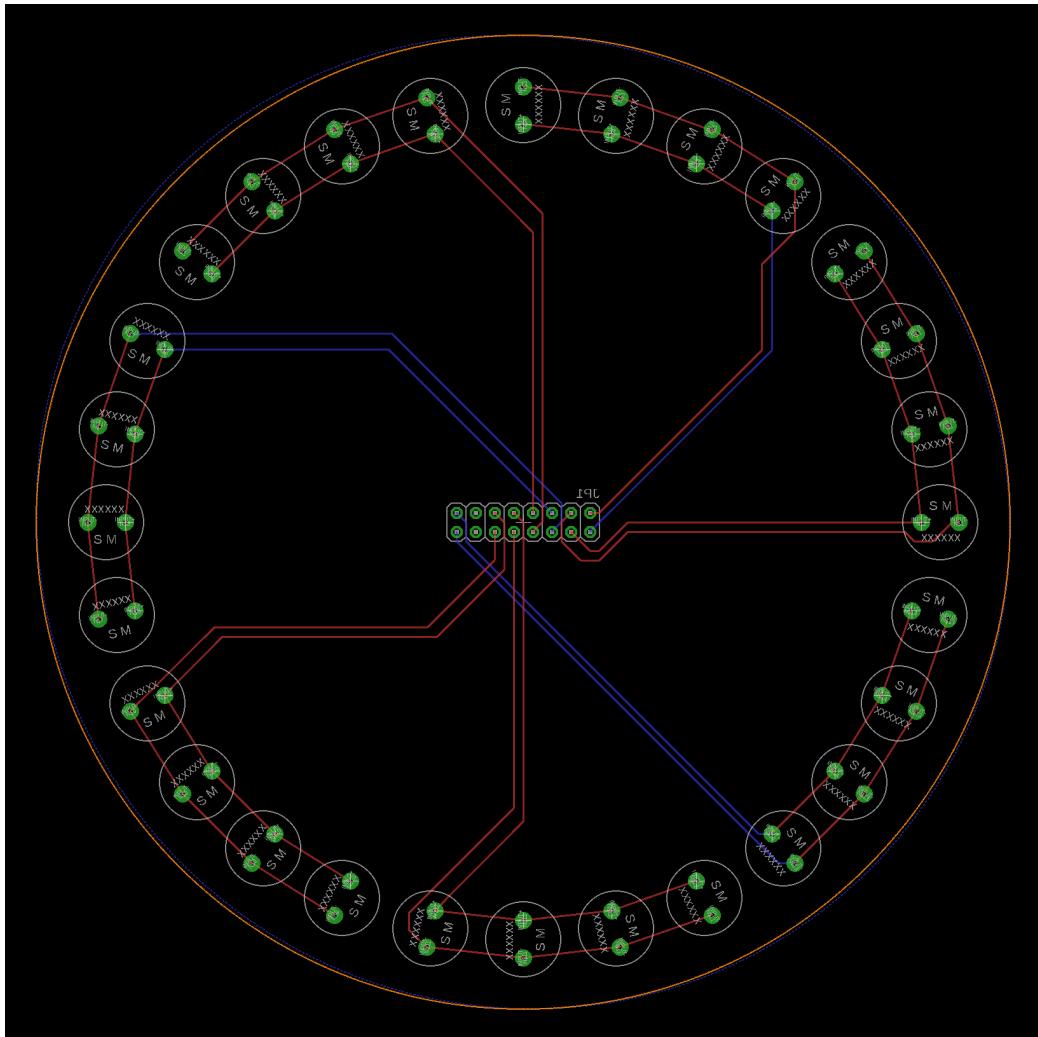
PCB layout of the piezo transducer array used in the prototype.
